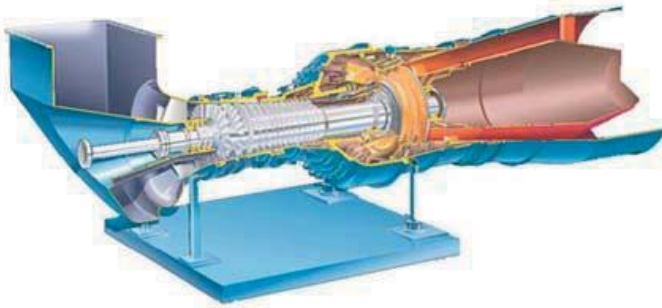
Siemens Energy SGT-800 engine with knee-shaped inlet device
